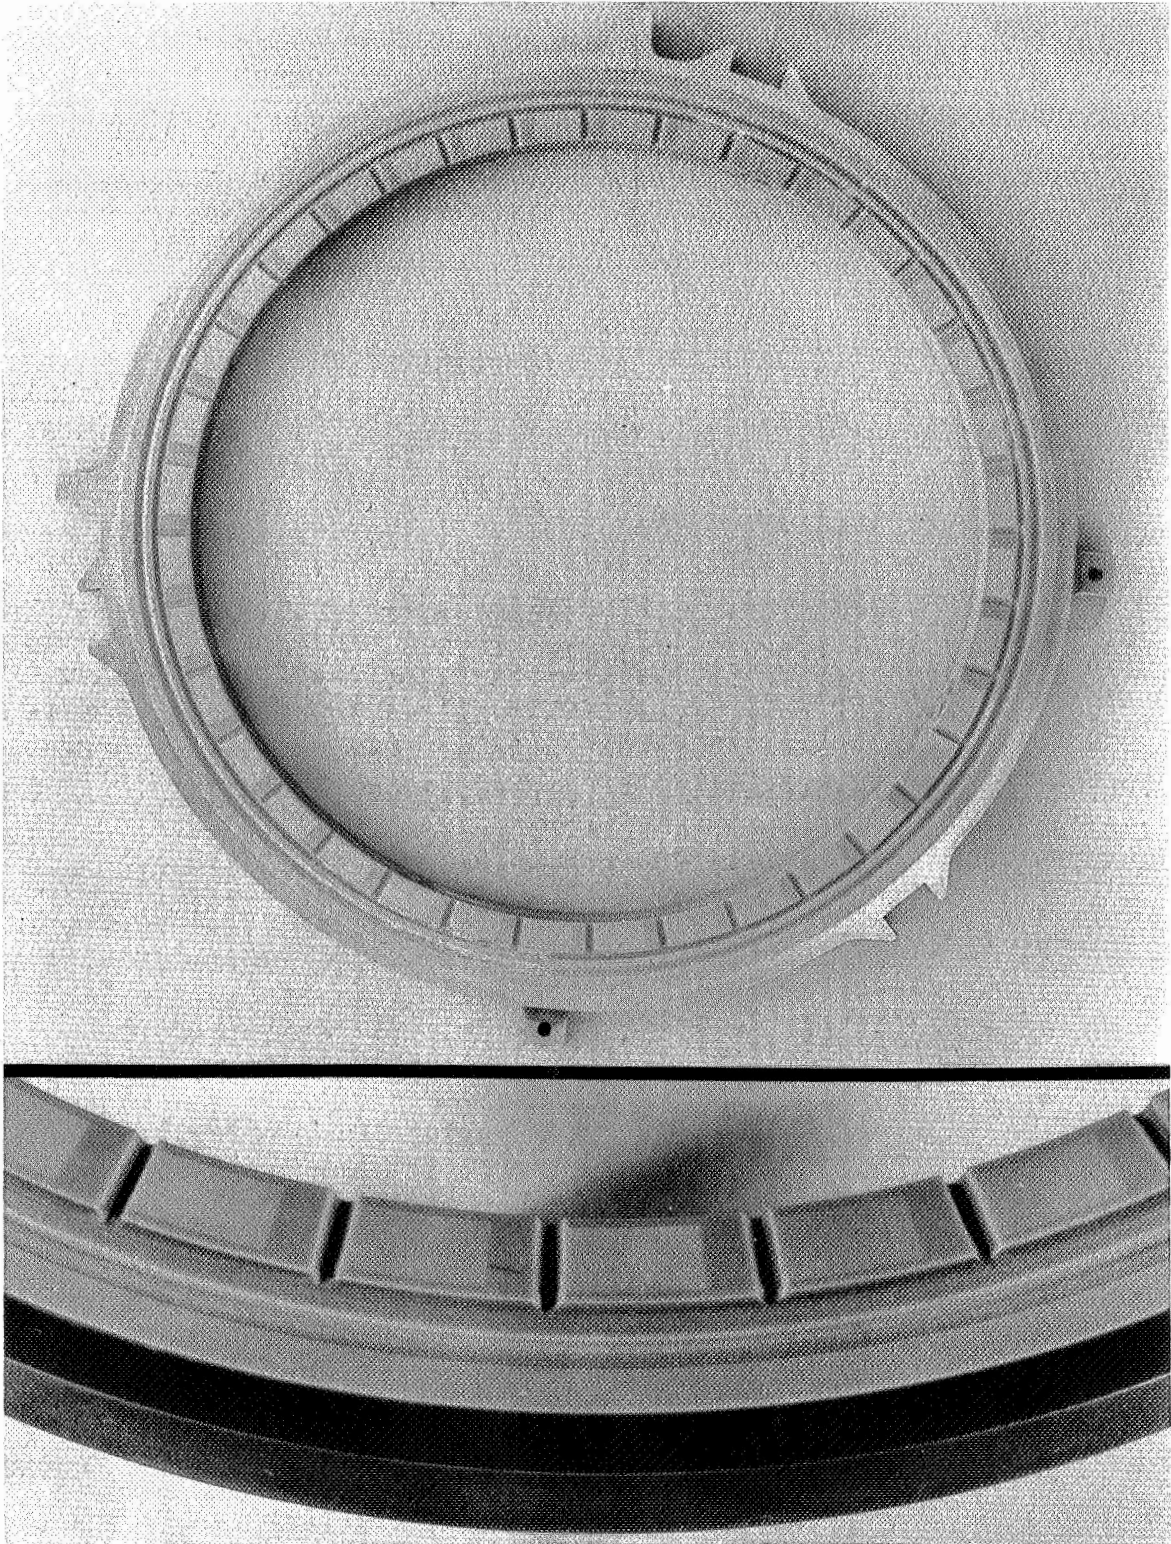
Completed Ceramic Nosepiece Ring Assembly with Close-Up of Ceramic Ring (CN-23132 & 23133)
